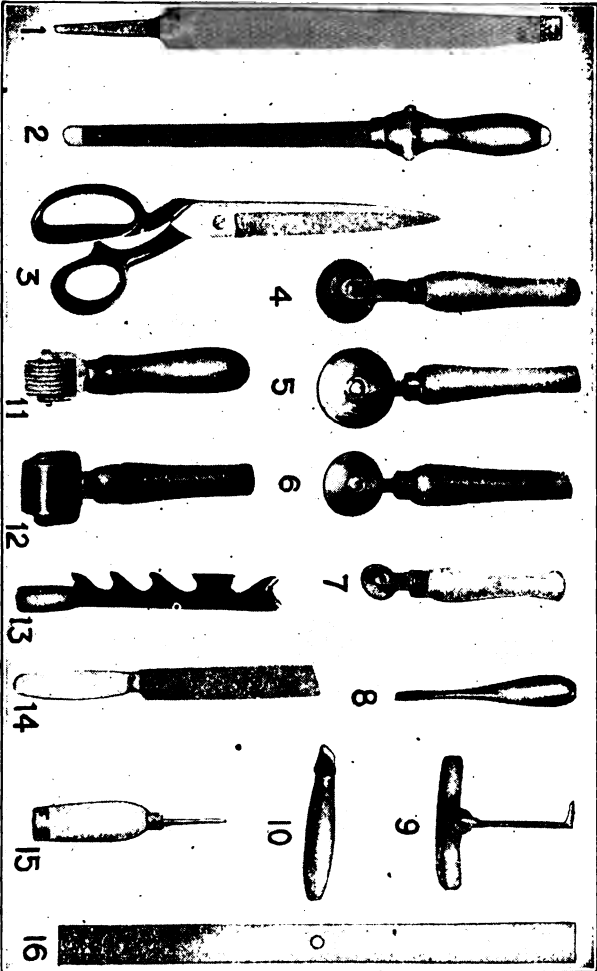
Building up tools. 1—rasp. 2—sharpening stick. 3—shears. 4 to 7—stitchers. 8—prodding tool. 9—tread gauge. 10—studding knife. 11, 12—rollers. 13—tire spreader. 14—trimming knife. 15—tire spreader. 16—steel rule.
